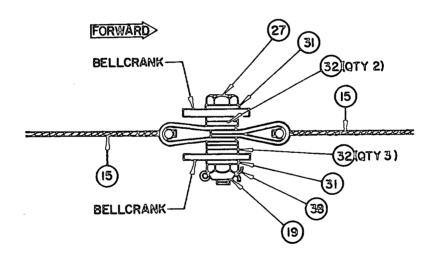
G BRIDLE CABLE ATTACHMENT
